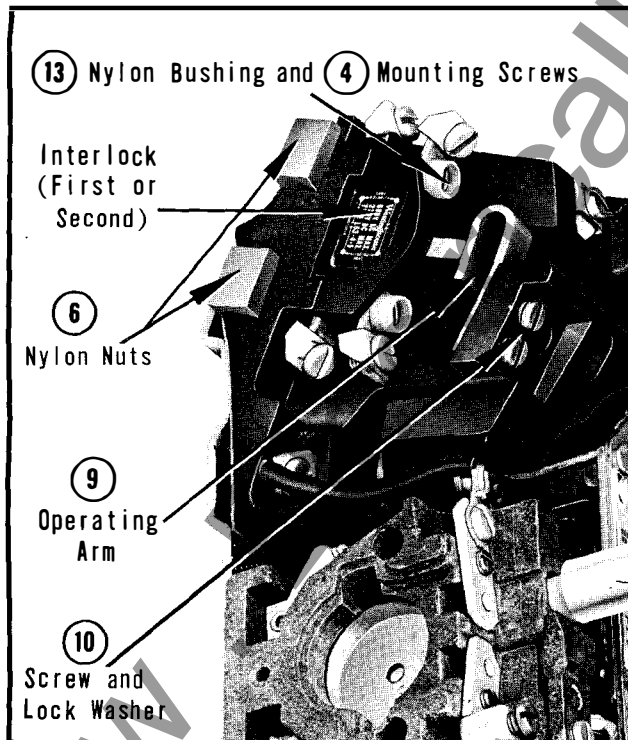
Left and Right Hand Mounted Standard Interlocks - Size 0 Life-Line Starter
